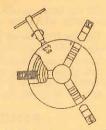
PARTS OF A WIVERSAL CHUCK
